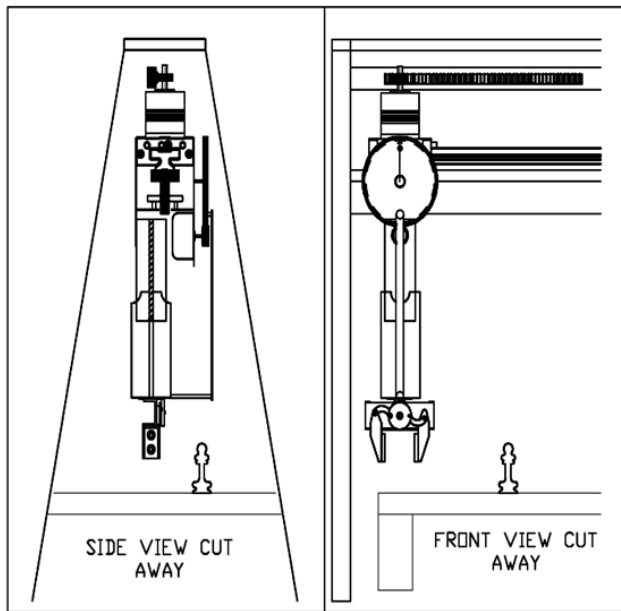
Grabber and Z axis cut away views. This picture was drawn using AutoCAD educational software.
